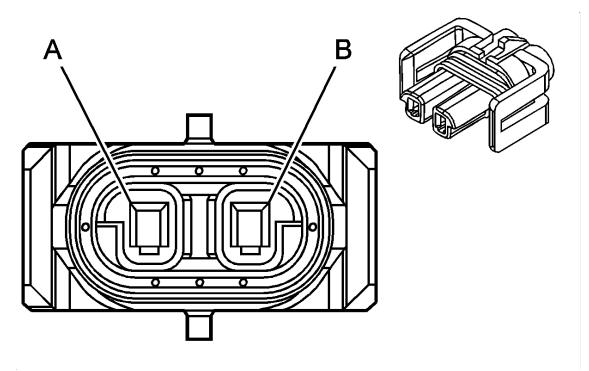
A/C Compressor Clutch Connector End Views Courtesy of GENERAL MOTORS CORP.
